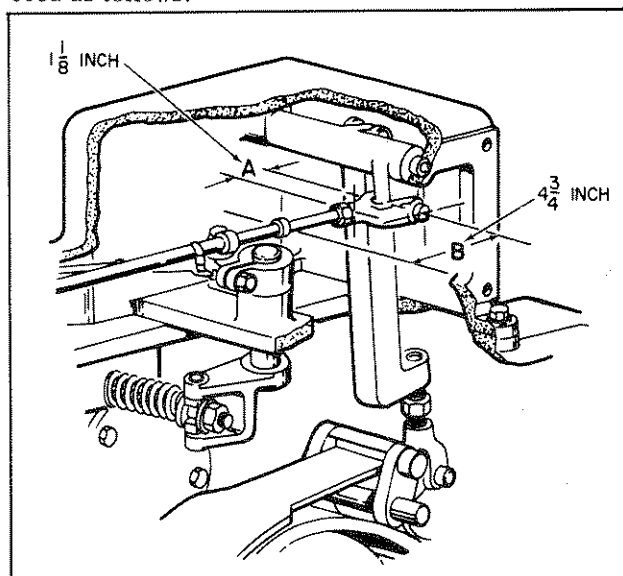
Direct Drive Brake Crankarm and Control Cable.
